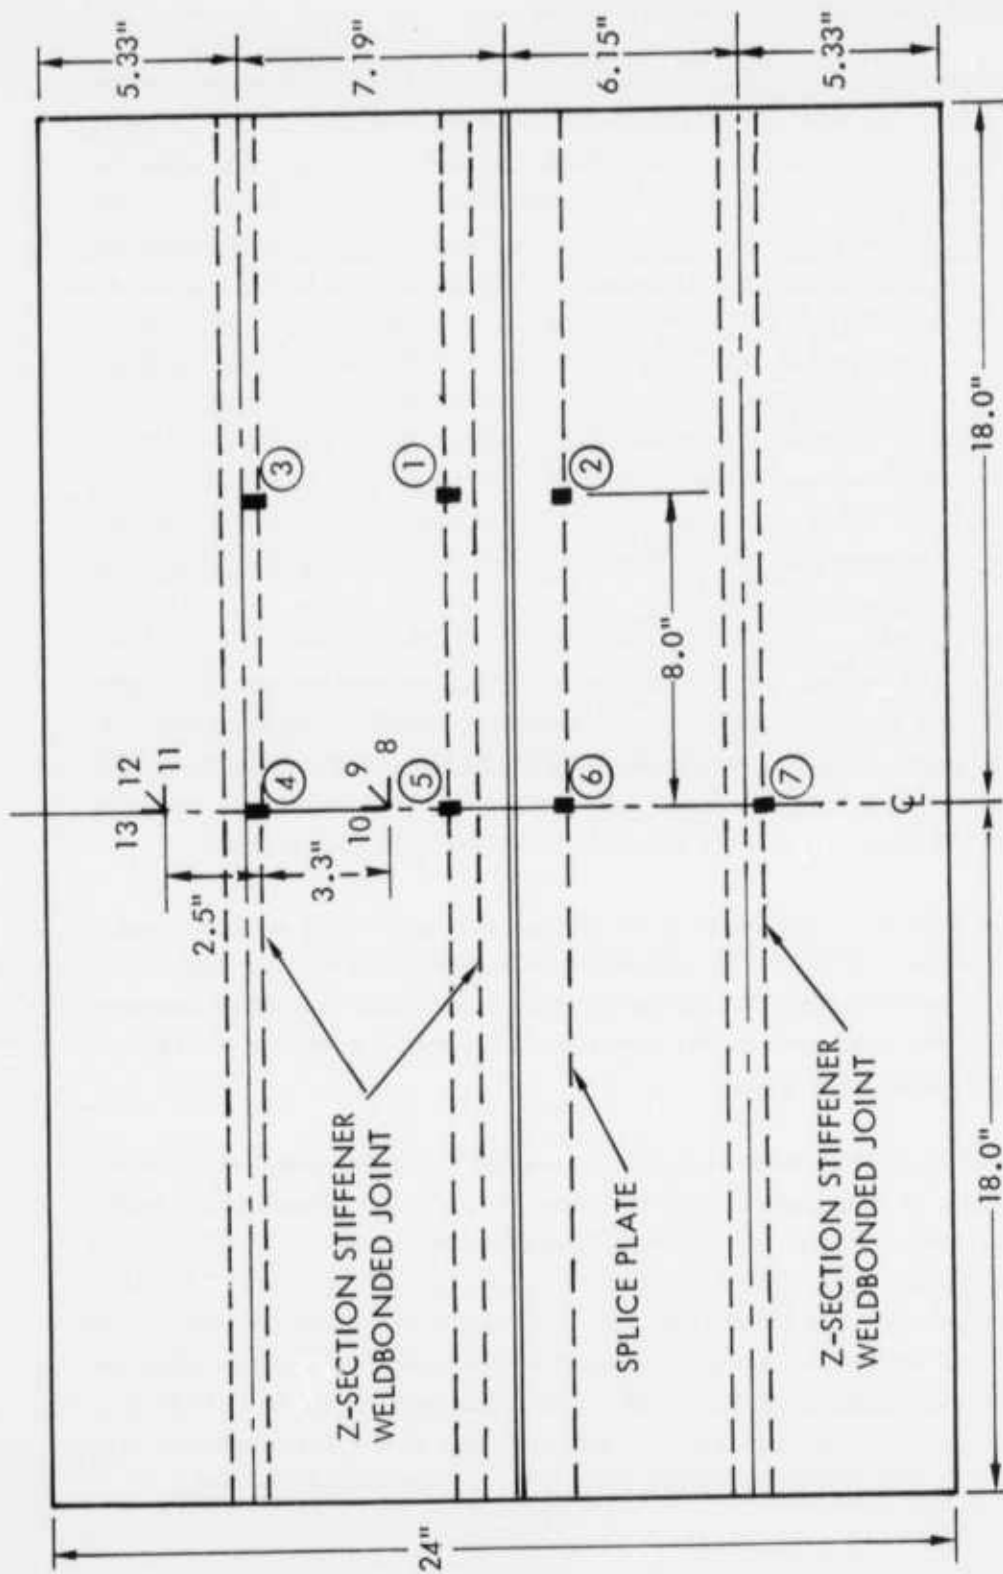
FLAT WELDBONDED TEST PANEL INSTRUMENTATION LAYOUT
